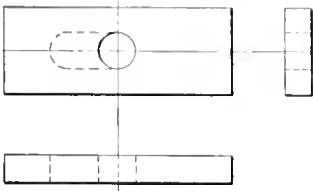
Form of Clamps used in Jigs and Fixtures.
